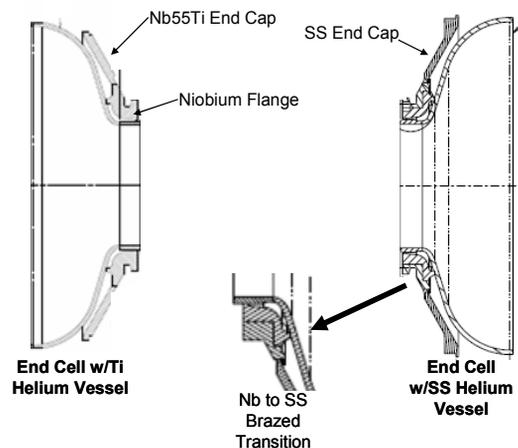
Comparison of ILC SRF Cavity End Cap Assembly Designs.
